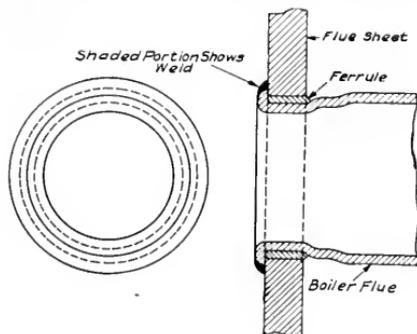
Diagram showing Proper Method of Welding Flues to Flue Sheet
